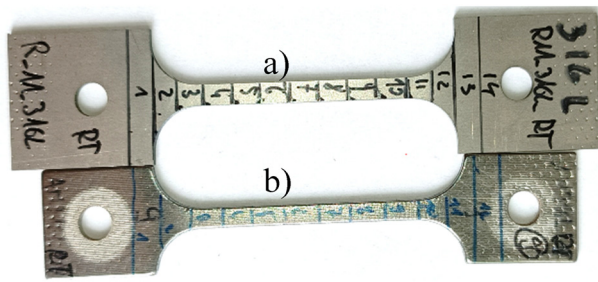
Specimen cut from sheet metal R 316L (a) and printed AM 316L (b).
